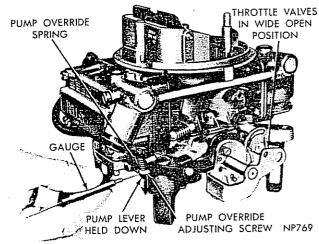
PUMP OVERRIDE SPRING ADJUSTMENT
